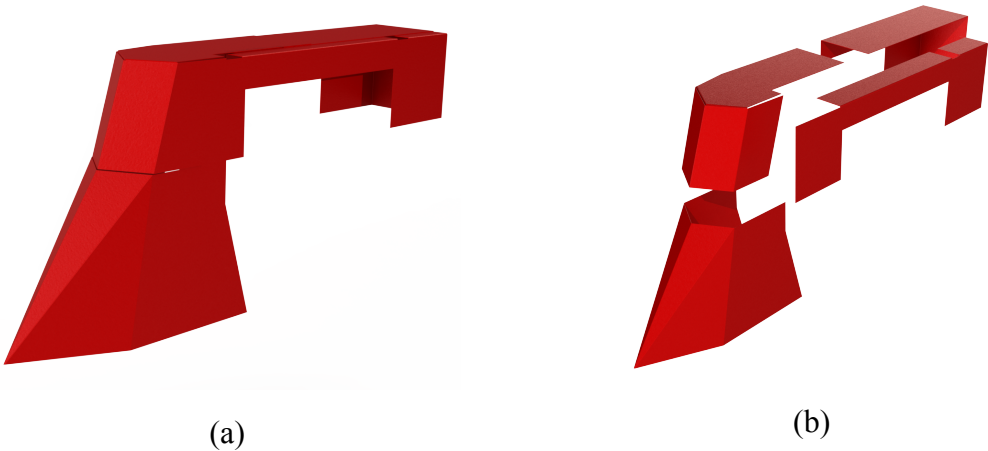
Covers (a) Assembled, (b) Exploded view
